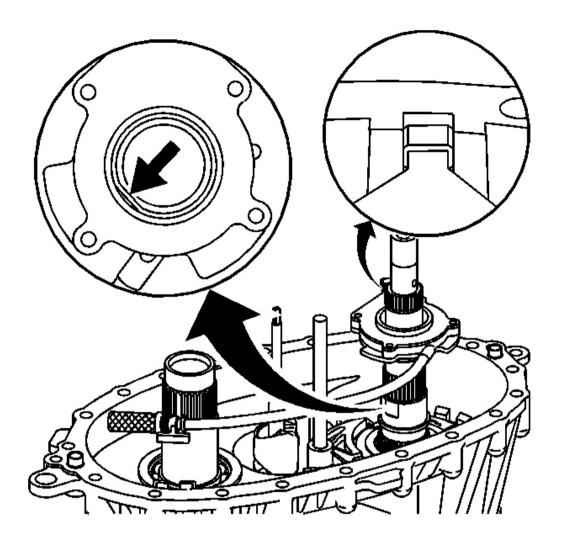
Expanded View Of Oil Pump Assembly Courtesy of GENERAL MOTORS CORP.
